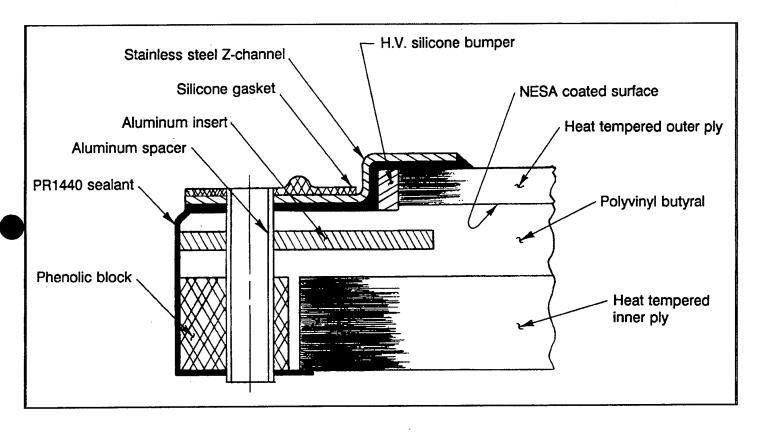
C/KC-135 #1 W/WS Cross-Section
